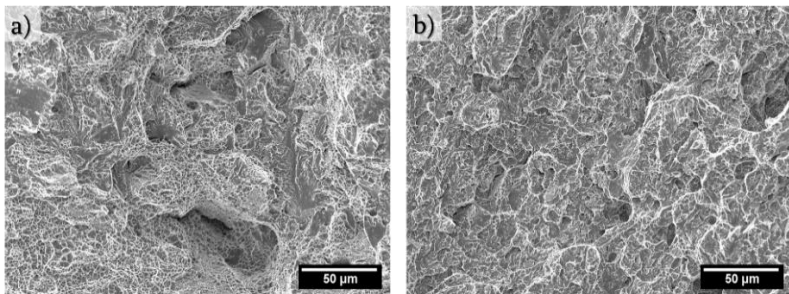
Higher magnification of fracture surfaces for a) QT-V and b)DT-V
